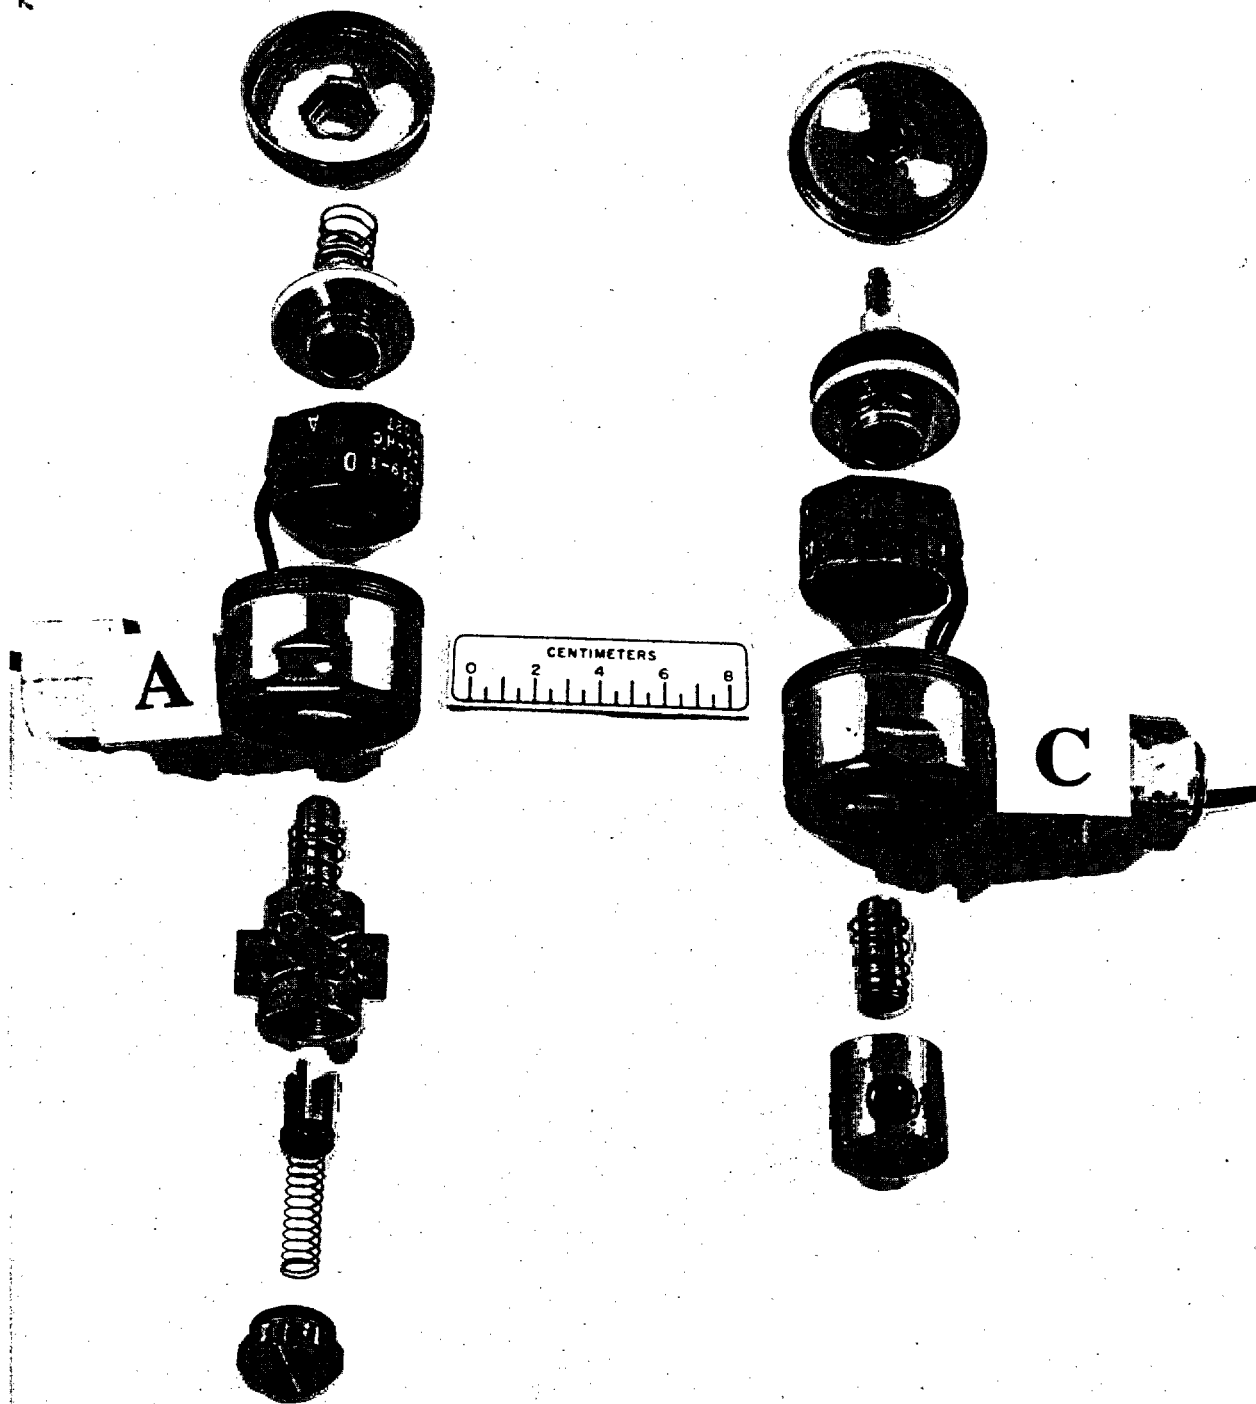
Photograph of disassembled SOVs "A" and "C" showing interior parts and differing construction details. (Both are three-way valves, but the placement of the third port is different.)
